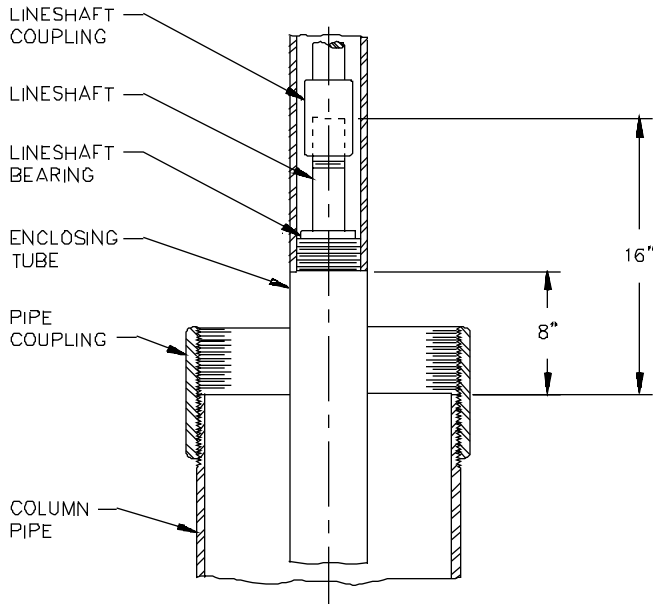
Standard Enclosing Tube and Lineshaft Projection
